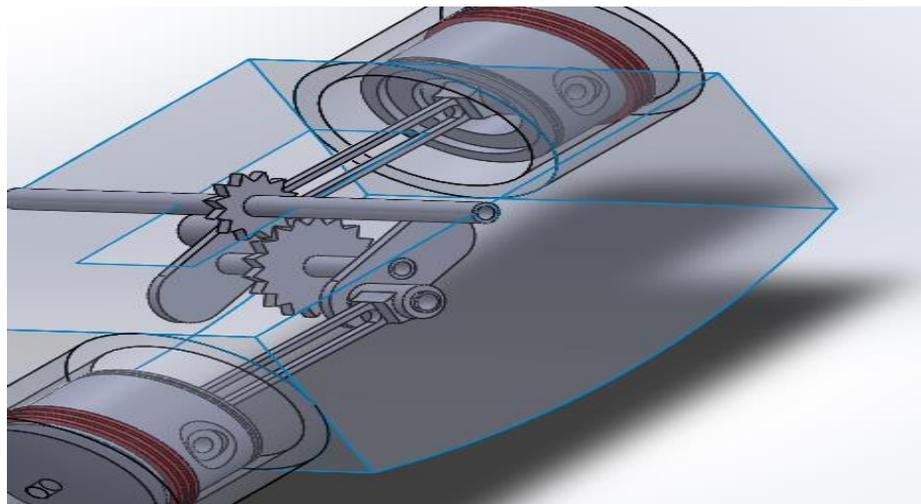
(d) Introducing a Simple Gear Train in FA-300 Twin Cylinder four-stroke boxer engine
